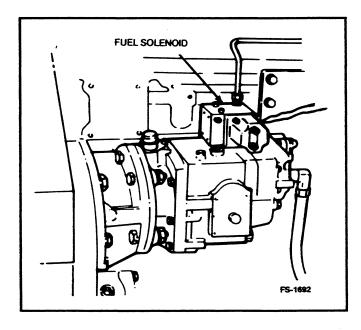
FUEL SOLENOID VALVE LOCATION
